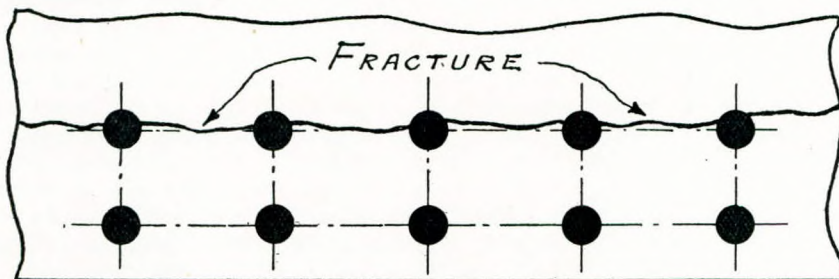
Dangerous type of plate fracture between the rivet holes.
